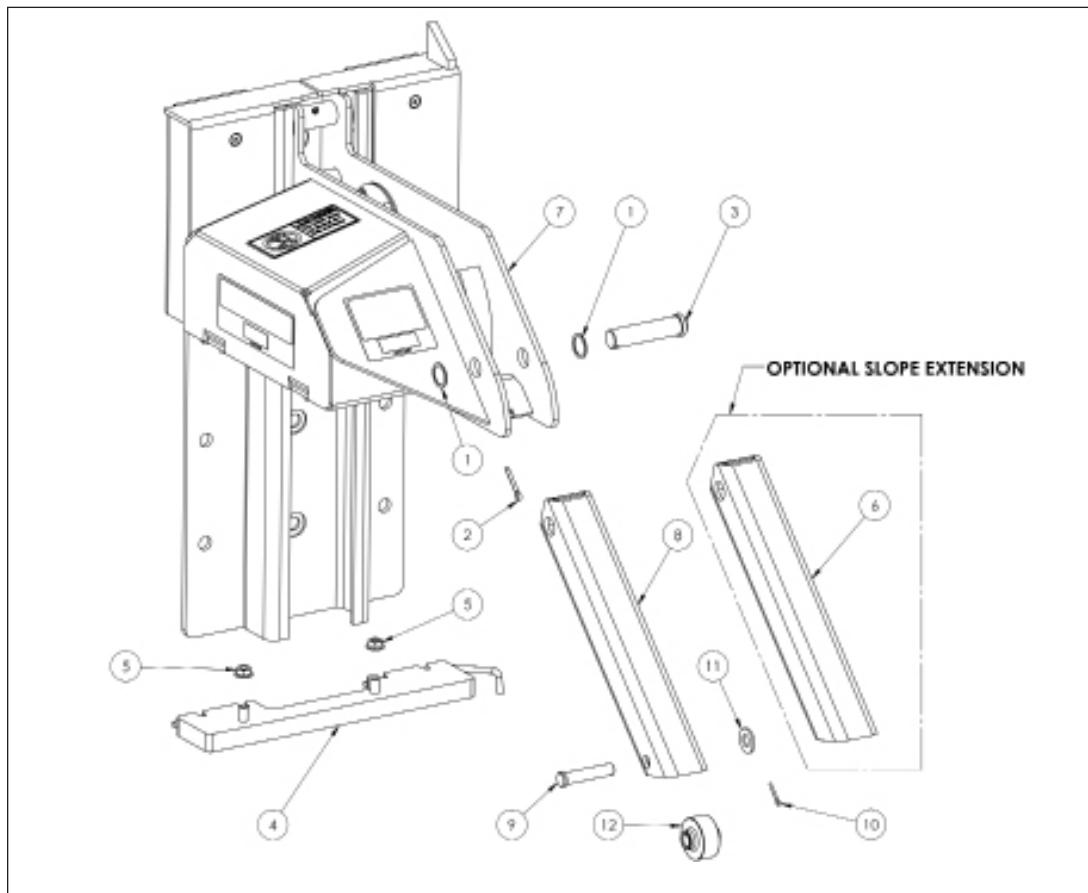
SLOPE EXTENSION ASSEMBLY
